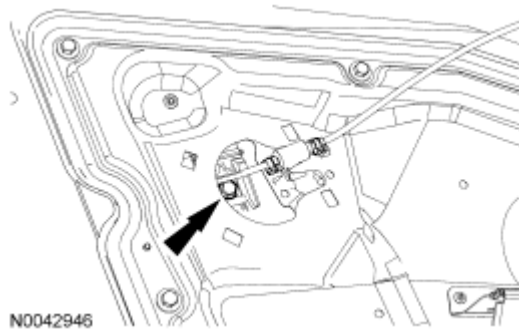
Locating B-Pillar Front Door Window Glass Clamp Bolt
